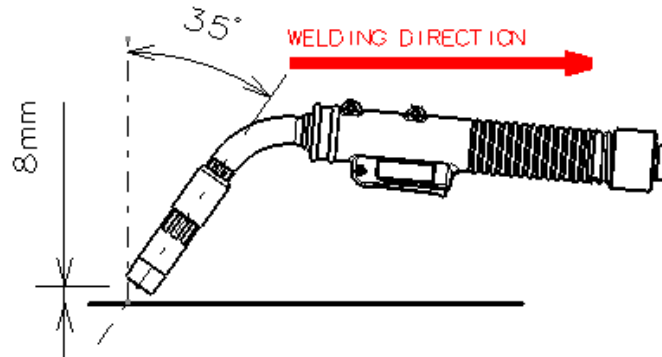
The welding direction and pulling angle between workpiece and welding torch
